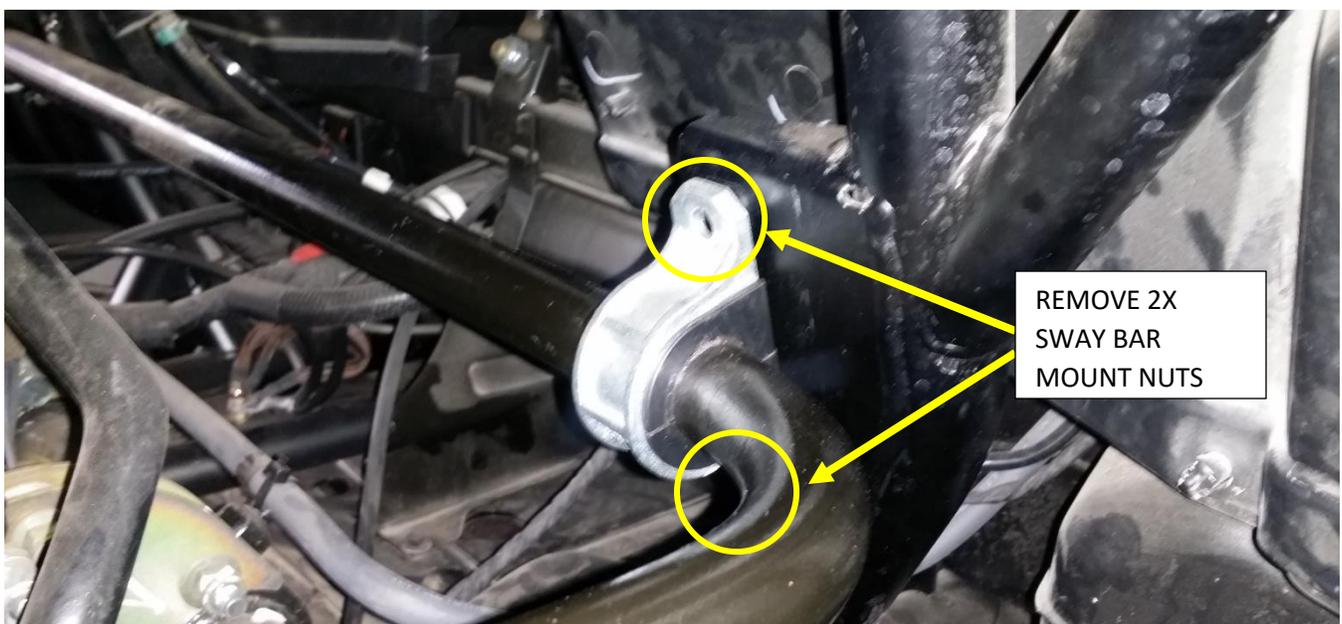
Driver Side Sway Bar Nuts/Bolts, to Remove
